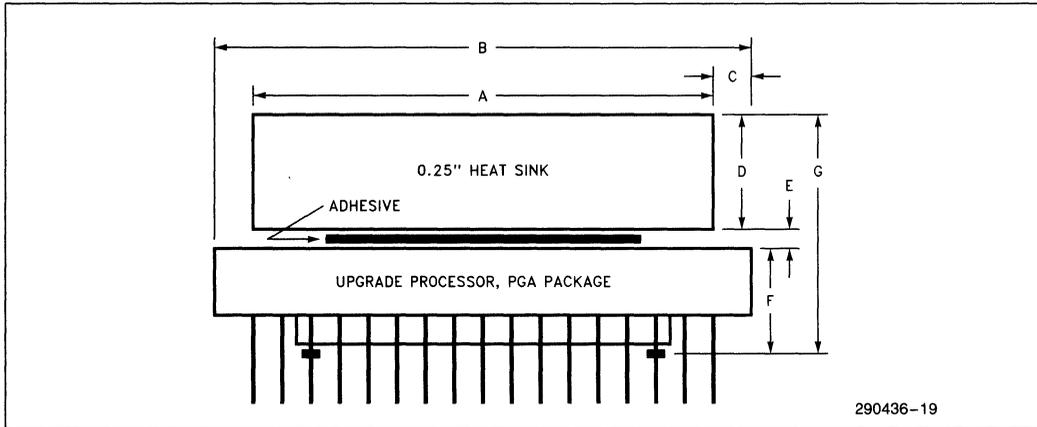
Dimensions, IntelDX2™ OverDrive® Processor with 0.25" Heat Sink
